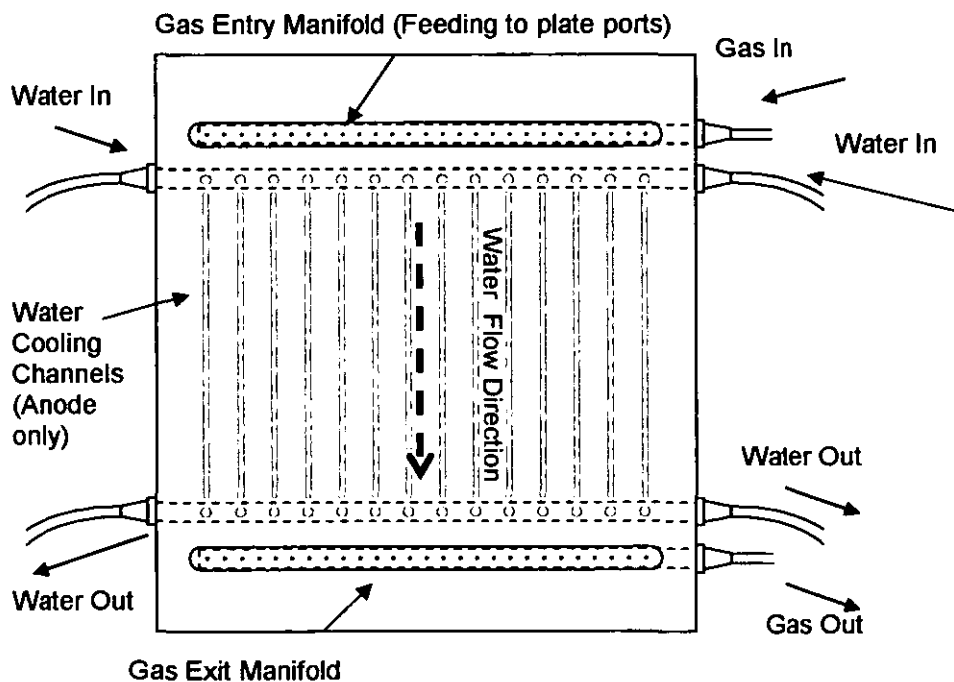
Machined PVDF insulating plate for anode side of fuel cell
